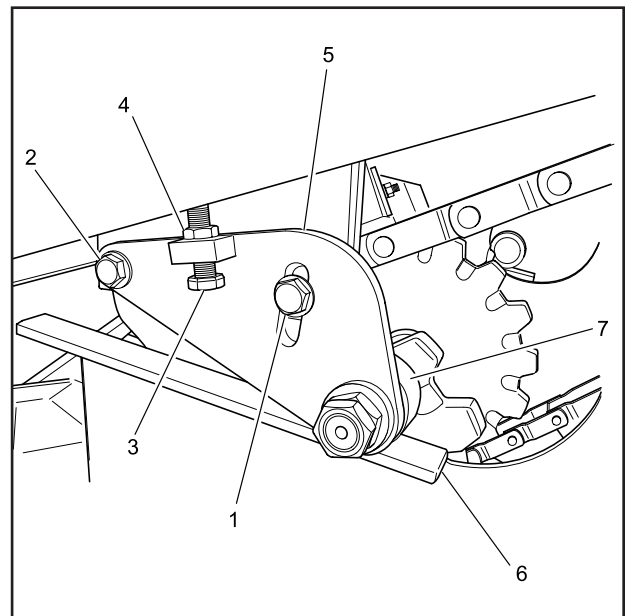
ROLLER ASSEMBLY ADJUSTMENT
